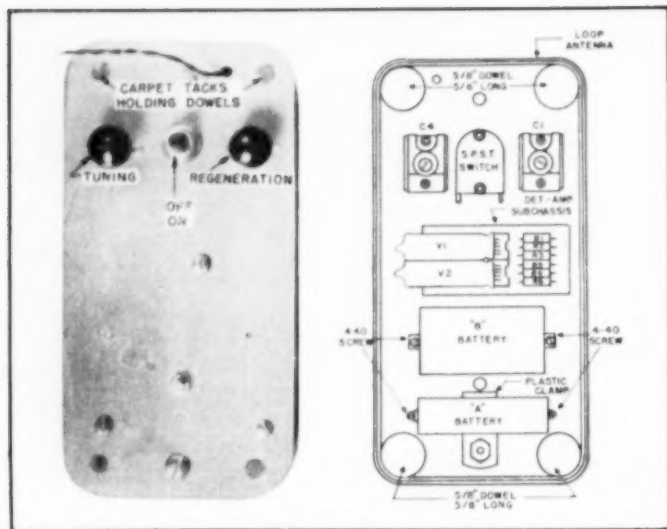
Front view of the receiver (left) showing location of the various controls. Mechanical drawing indicates how the various component parts should be placed.
